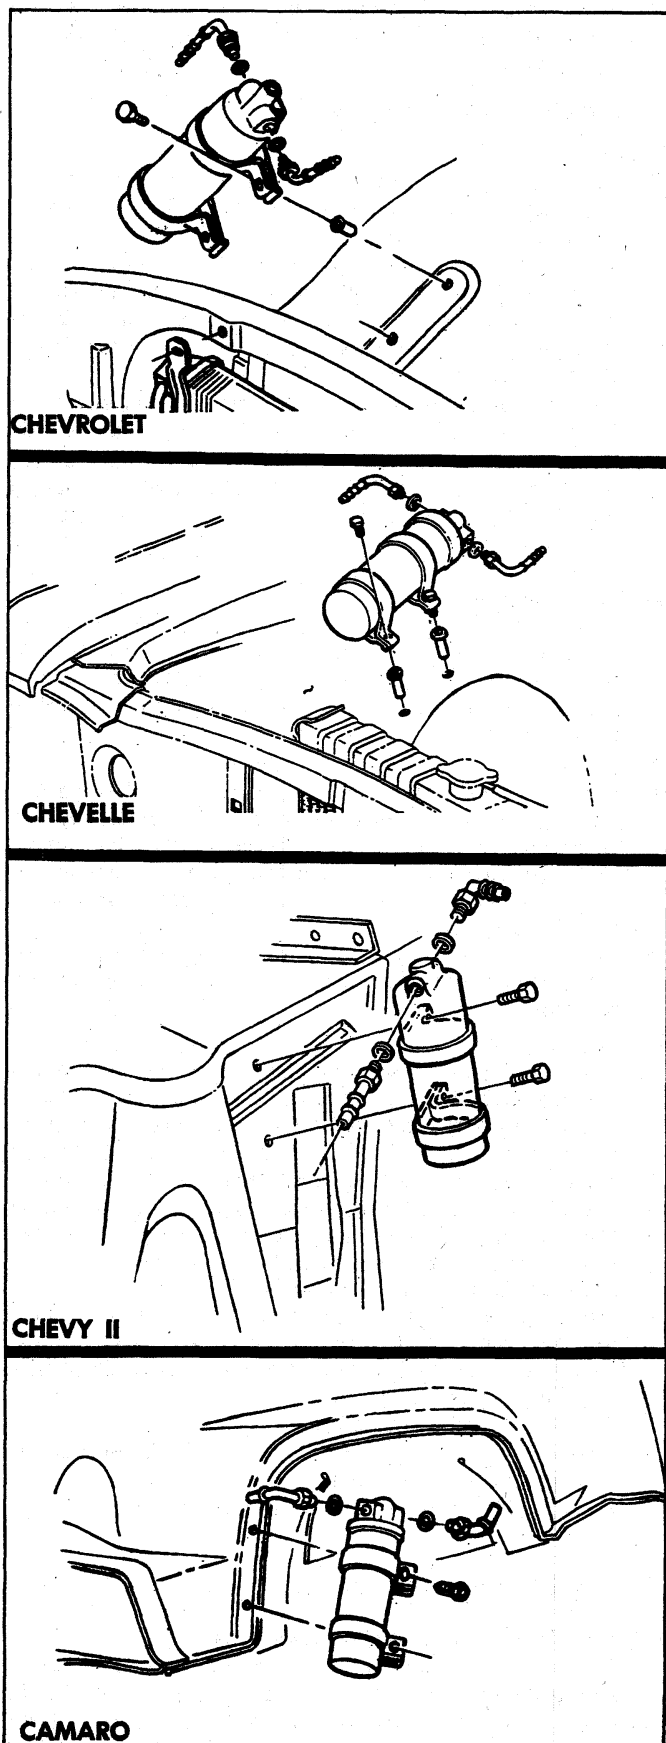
Receiver-Dehydrator Mounting (Chevrolet, Chevelle, Chevy II, Camaro)
